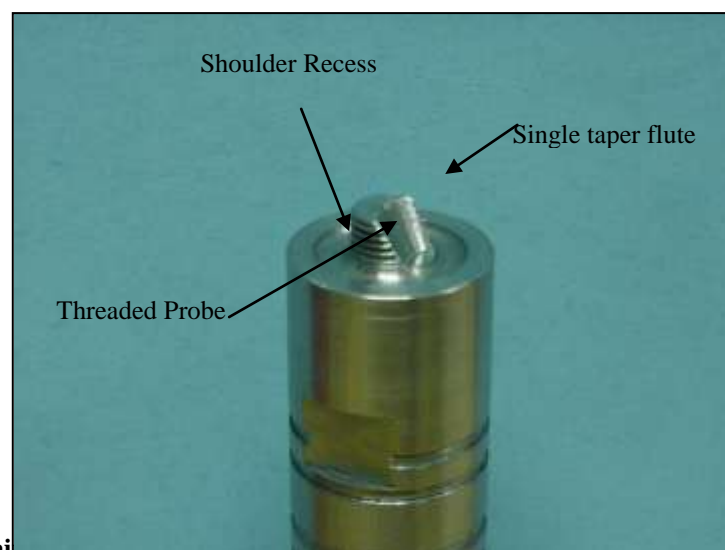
This tool design features a single taper flute and a recessed shoulder design
